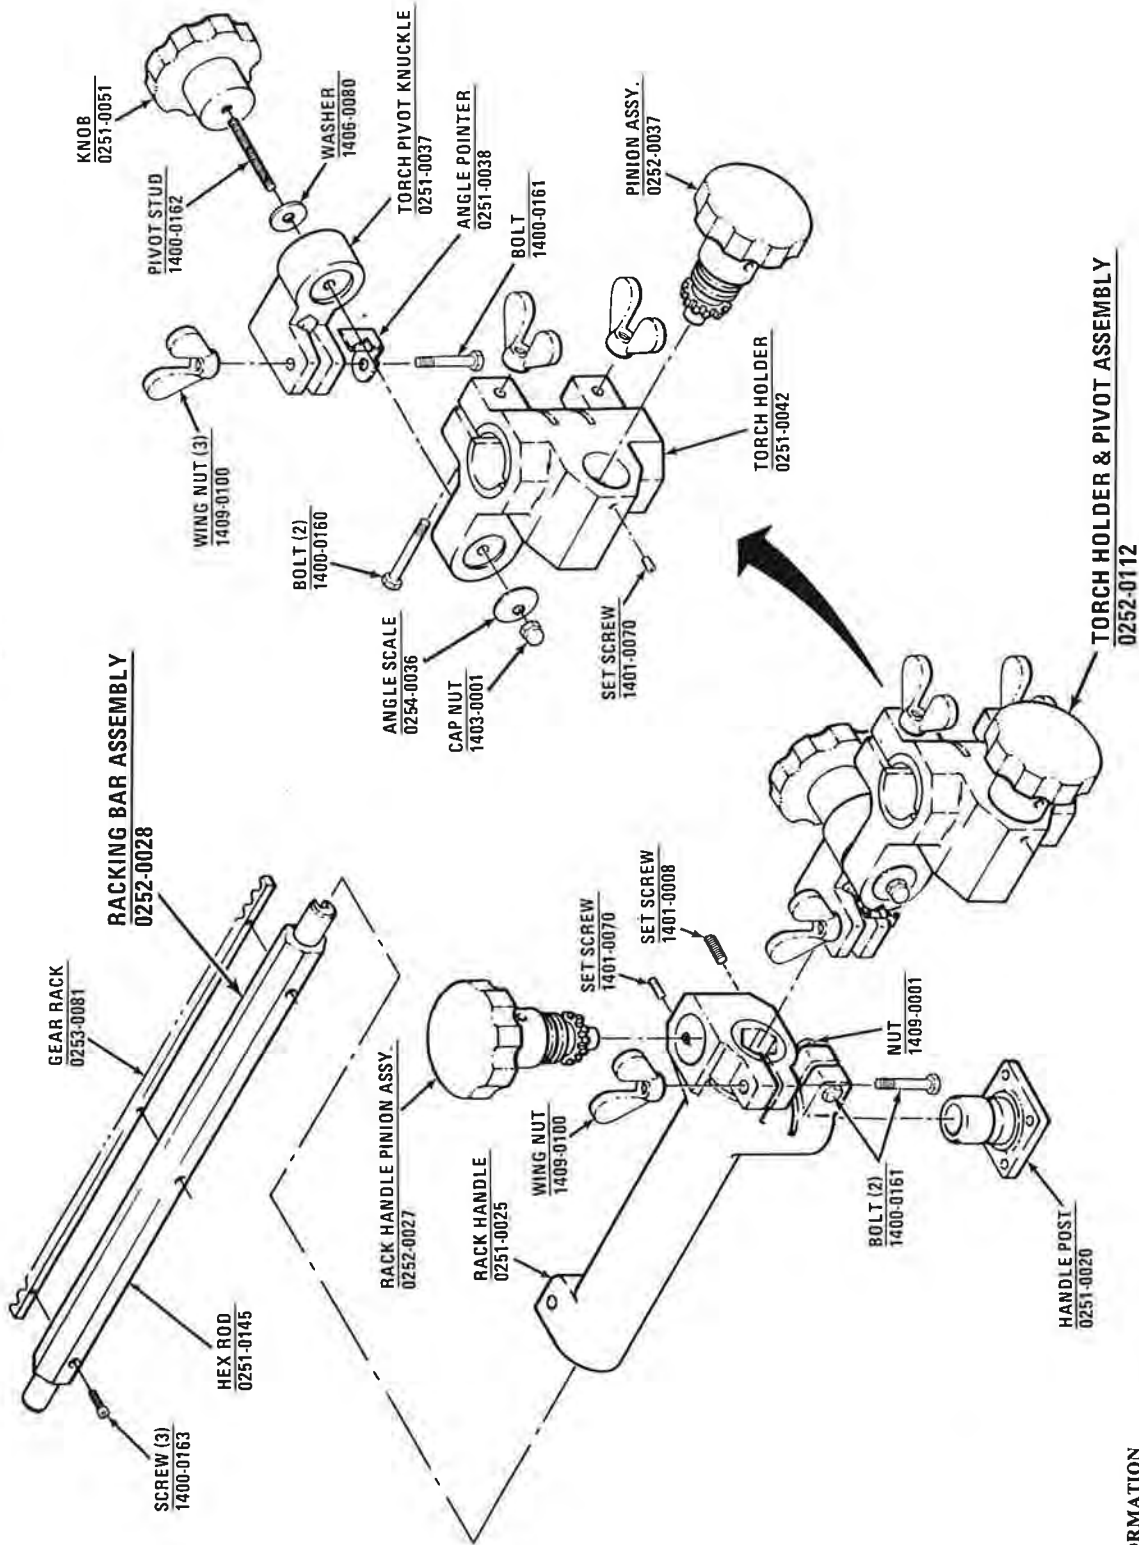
VCM-100 Rigging Assembly 0252-0101
